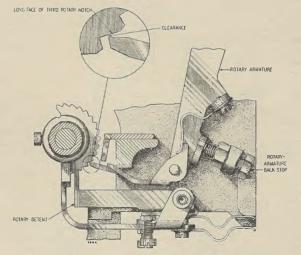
ADJUSTING POSITION OF ROTARY MAGNET
